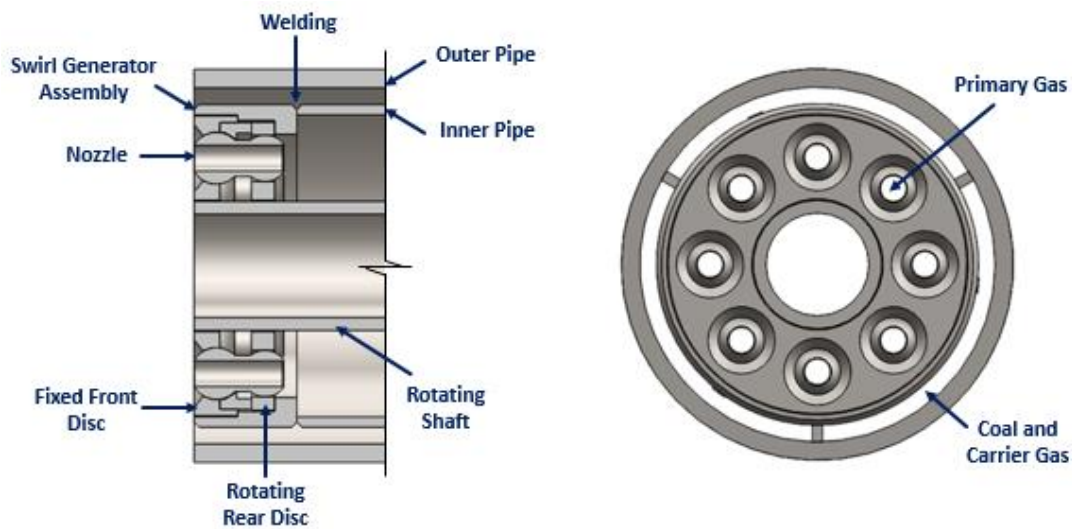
View of burner tip attachment. Left: detail of primary gas nozzle mechanism. Right: front view.
